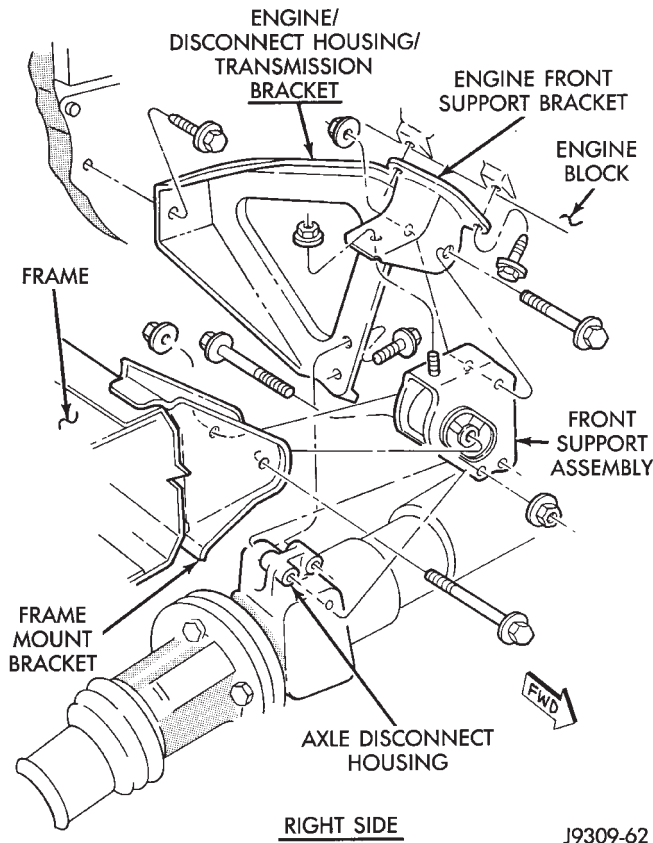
Engine and Axle Front Support—4WD Vehicles
